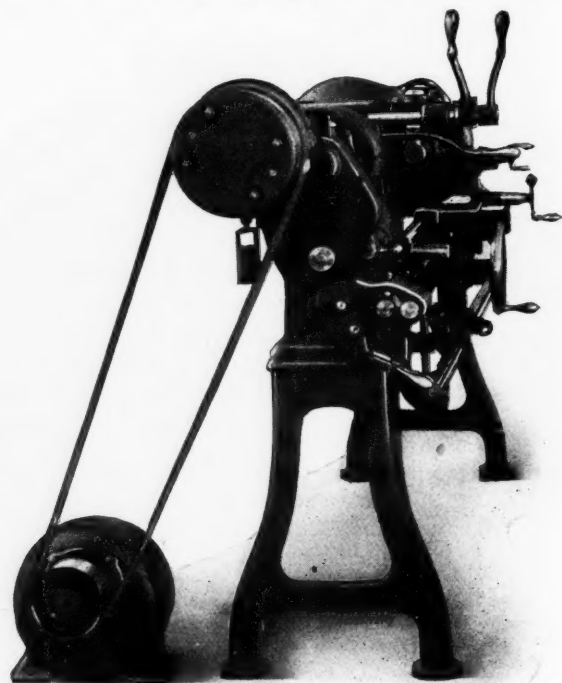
16-inch Selective Head Lathe with "Simplicity" Motor Drive
